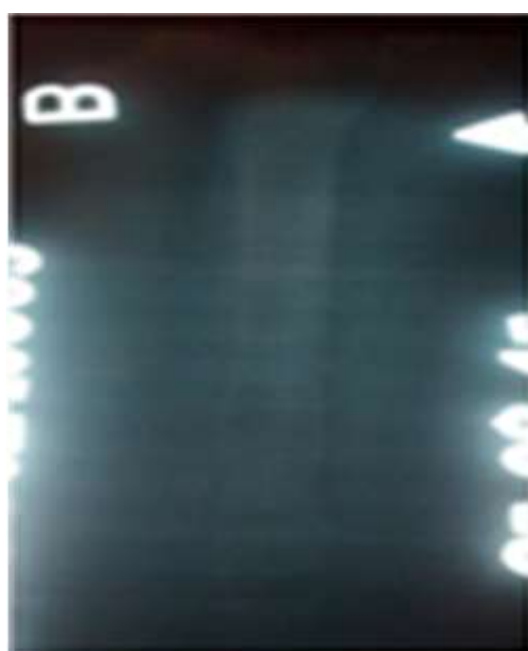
Radiography of Weld Joint 5083-O + 6061-T651
